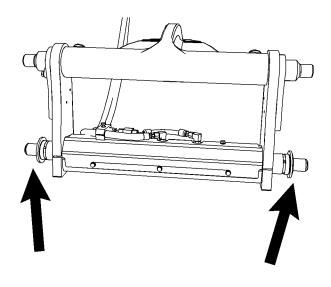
Horizontal Pin Work Tool Coupler g03803489
